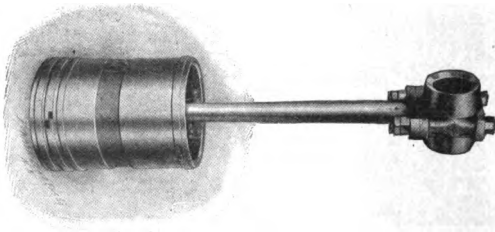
Piston with Rings, Connecting Rod and Bearings Assembled.
